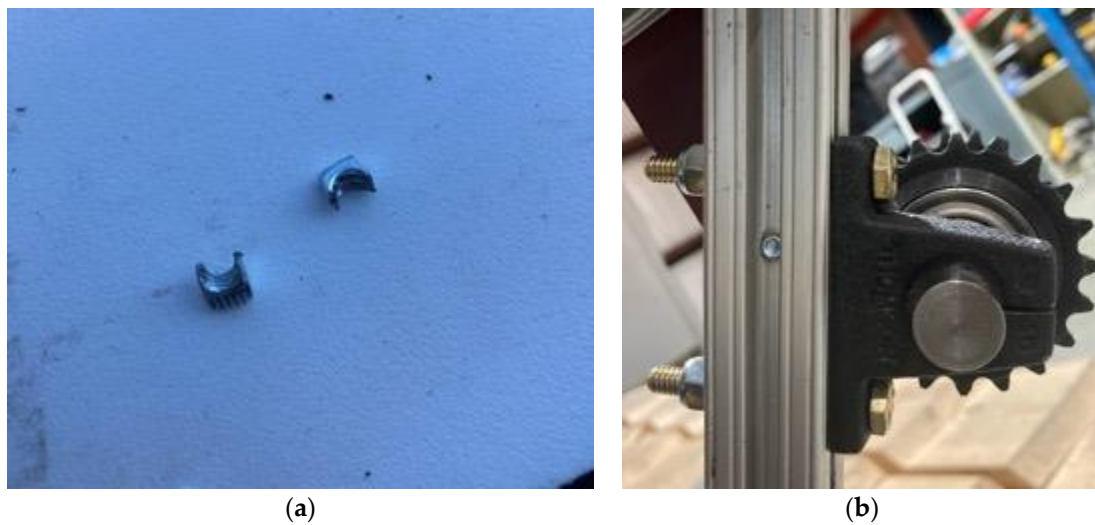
(a) Split #10-32 mounting nuts from the validation test; (b) Improved mounting configuration using 1/4-in.–20 hardware.
